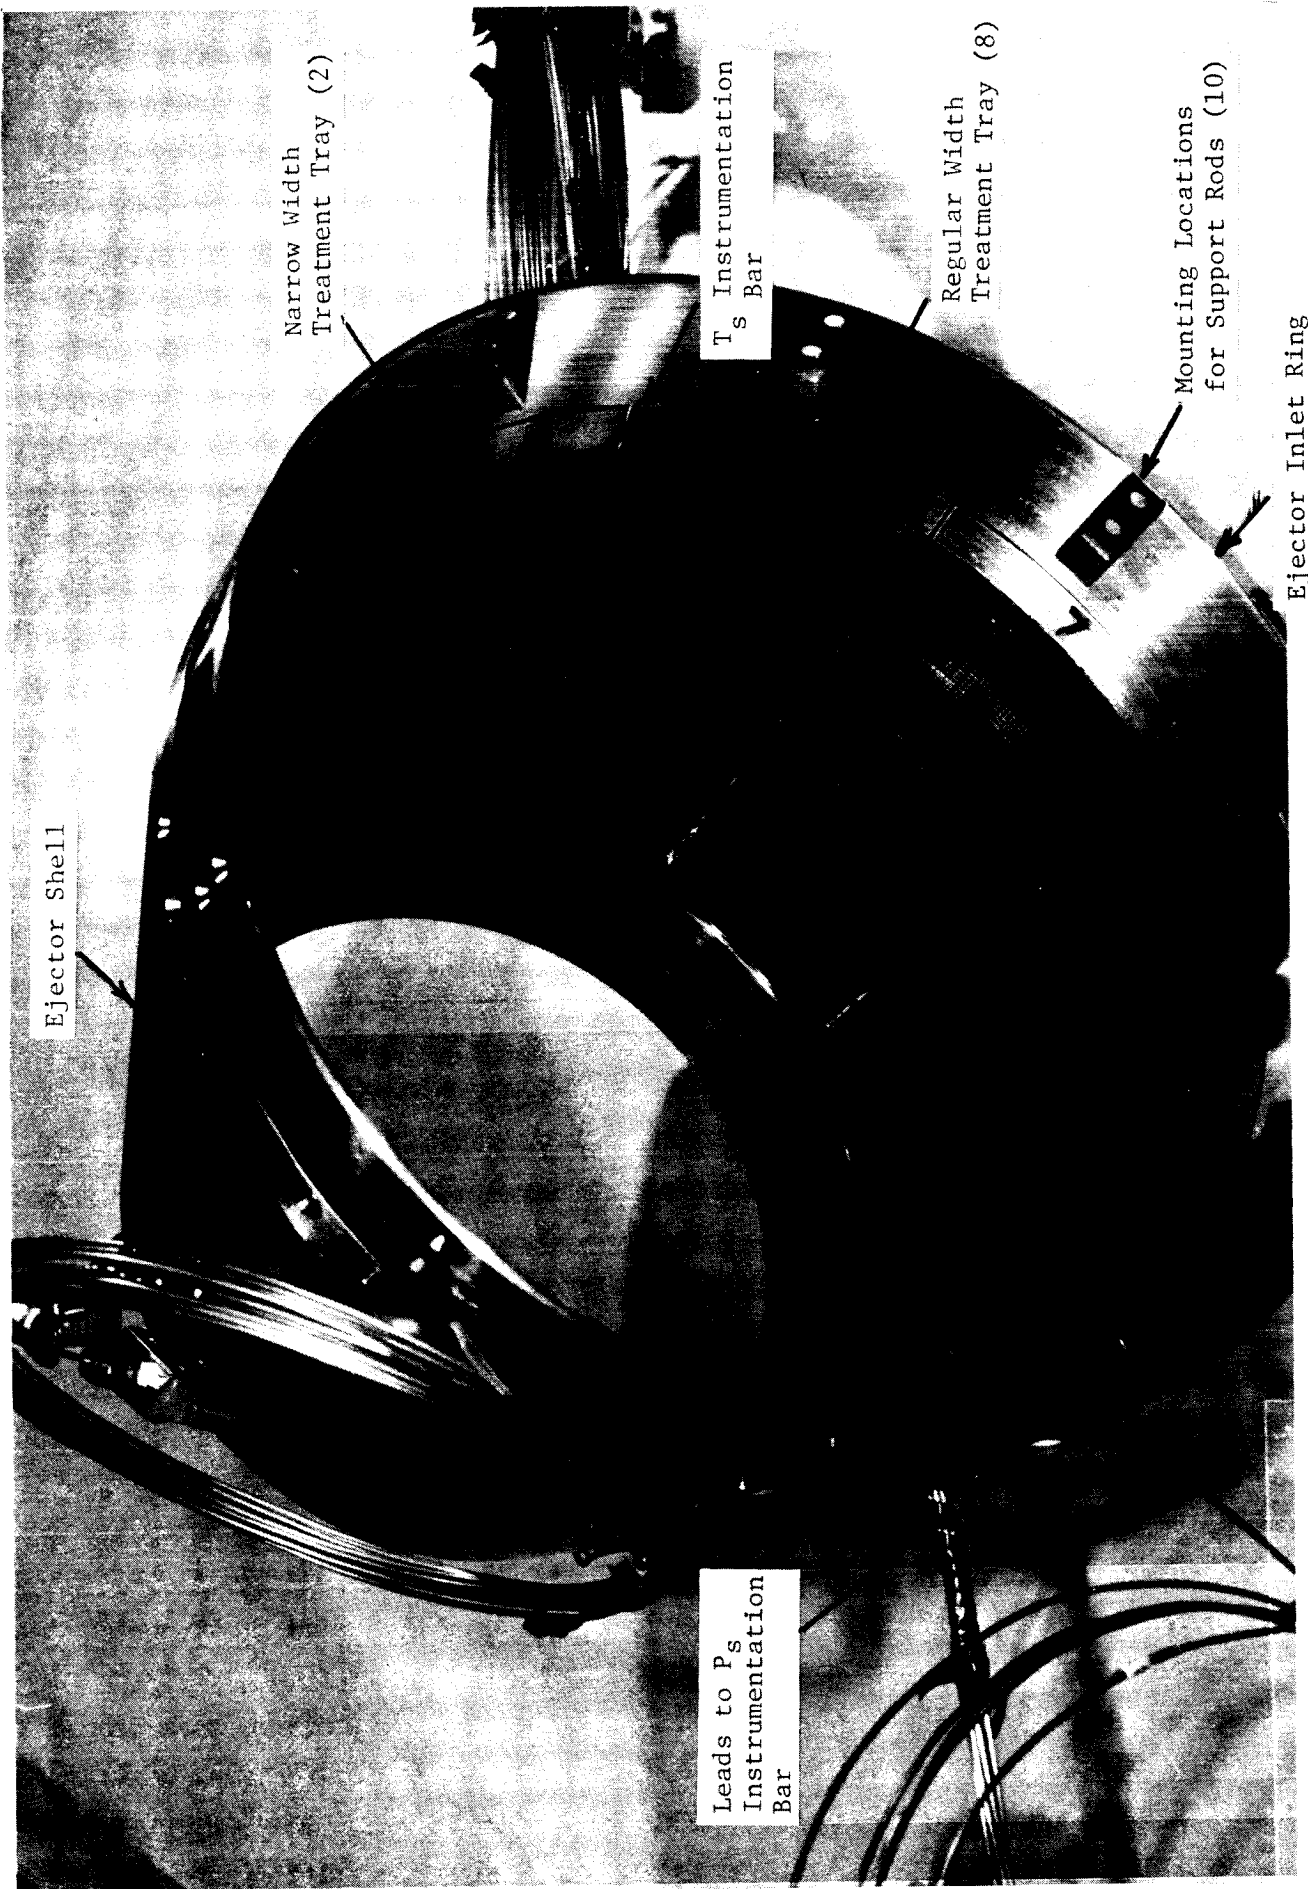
EXTENDED LENGTH EJECTOR ASSEMBLY, FWD-LOOKING-AFT
